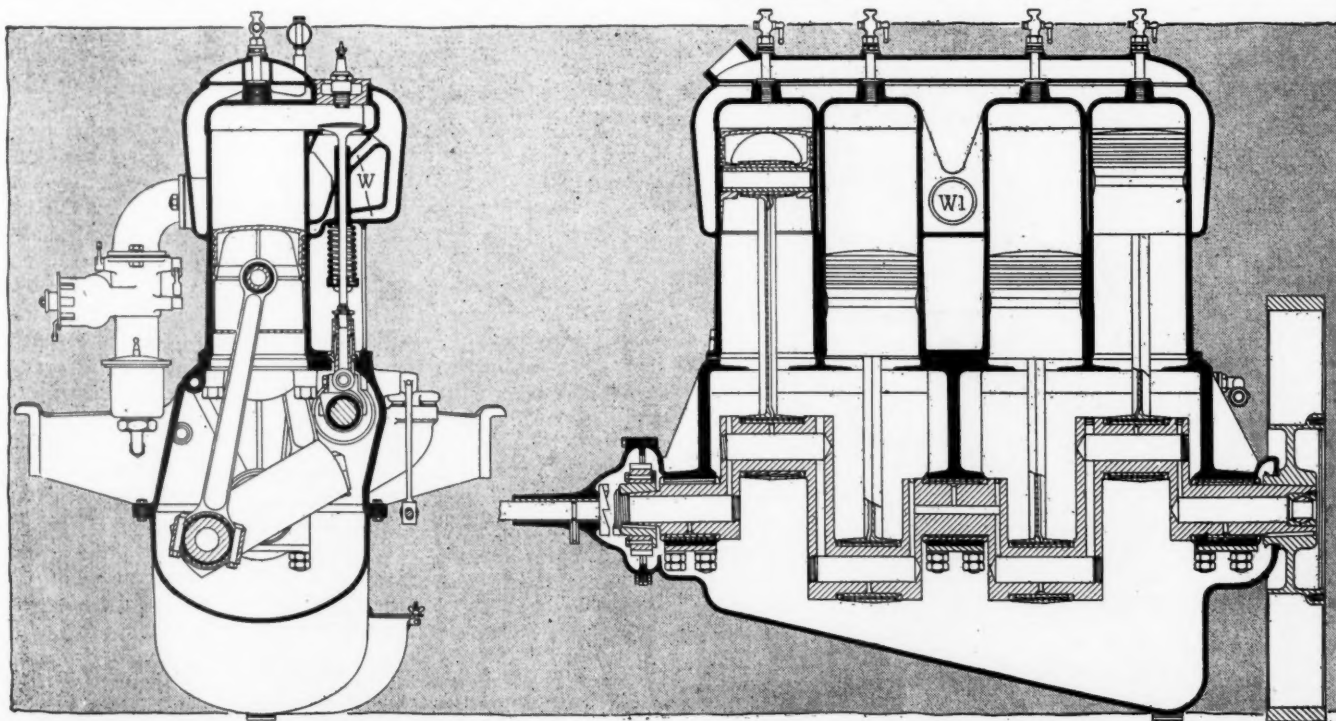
Transverse and longitudinal cross-sectional views through the four-cylinder Fiat motor, illustrating oiling system
